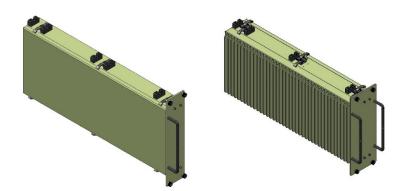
Series 100 (left) and 300 (right, with heatsink) ARCS Module housings employed in the reference design.
